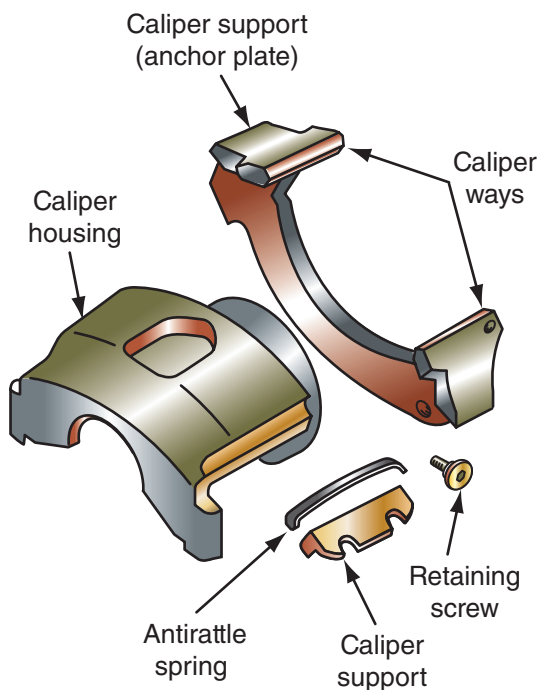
To remove a sliding caliper, remove the support retaining screws, antirattle springs and then the supports.
